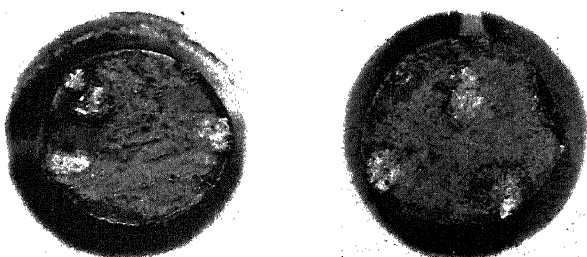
FRACTURES TEST-BAR 948A. SAME FORGING AS FIG. 23 AFTER AN ANNEAL, TWO QUENCHES AND A DRAW. $\times 2$.
